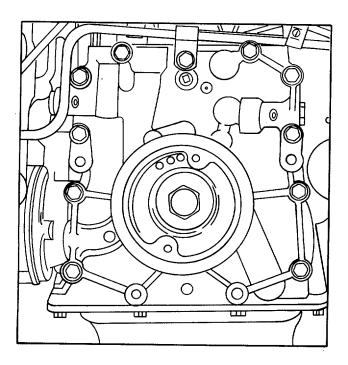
Engine Front Cover Mounting (Lower) - In-Line Engine Remove Engine Front Cover
